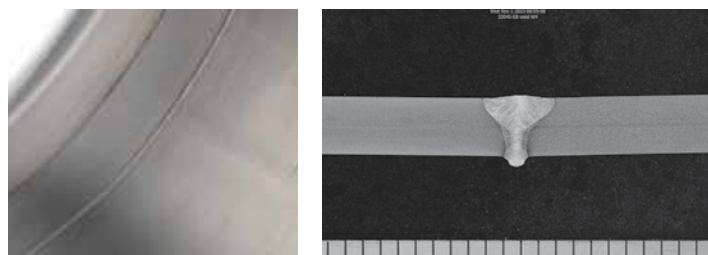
Internal EB weld next to the TIG weld root with a metallographic section of the EB weld.
